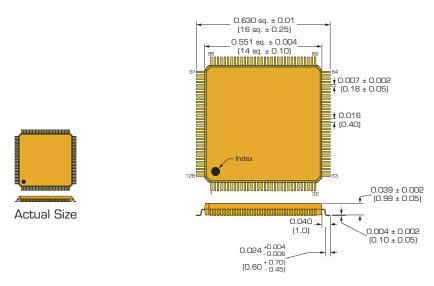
M3000S TQFP-128 Dimensions, Quad Package Top View
